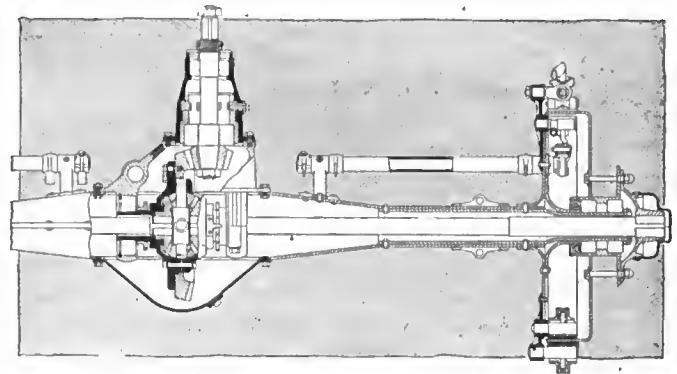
The Metal Products Company's style 18 bevel-gear rear axle. The housing is made in two halves, riveted together along truss flanges
